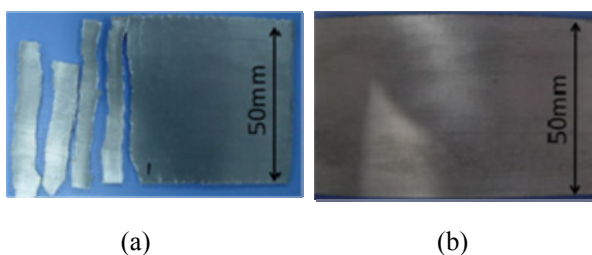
(a) As cast strip has crack after cold rolling. (b) Cold rolling and that after annealing heat material
